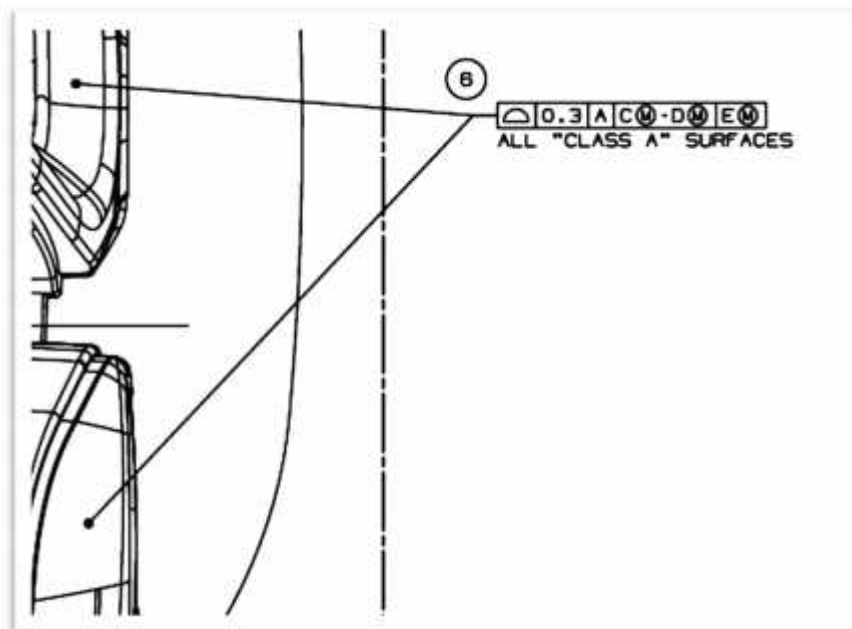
Surface identification in part drawing. Designated surface is identified as Class "A"
